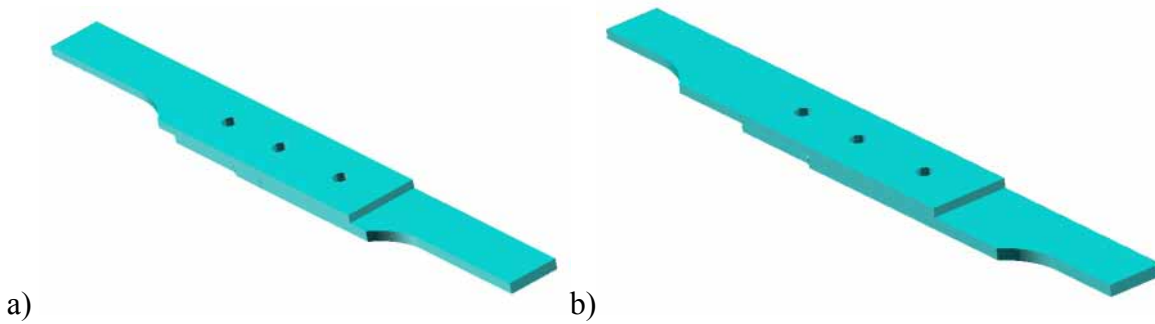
Specimen geometry a) specimen 2, b) specimen 3
